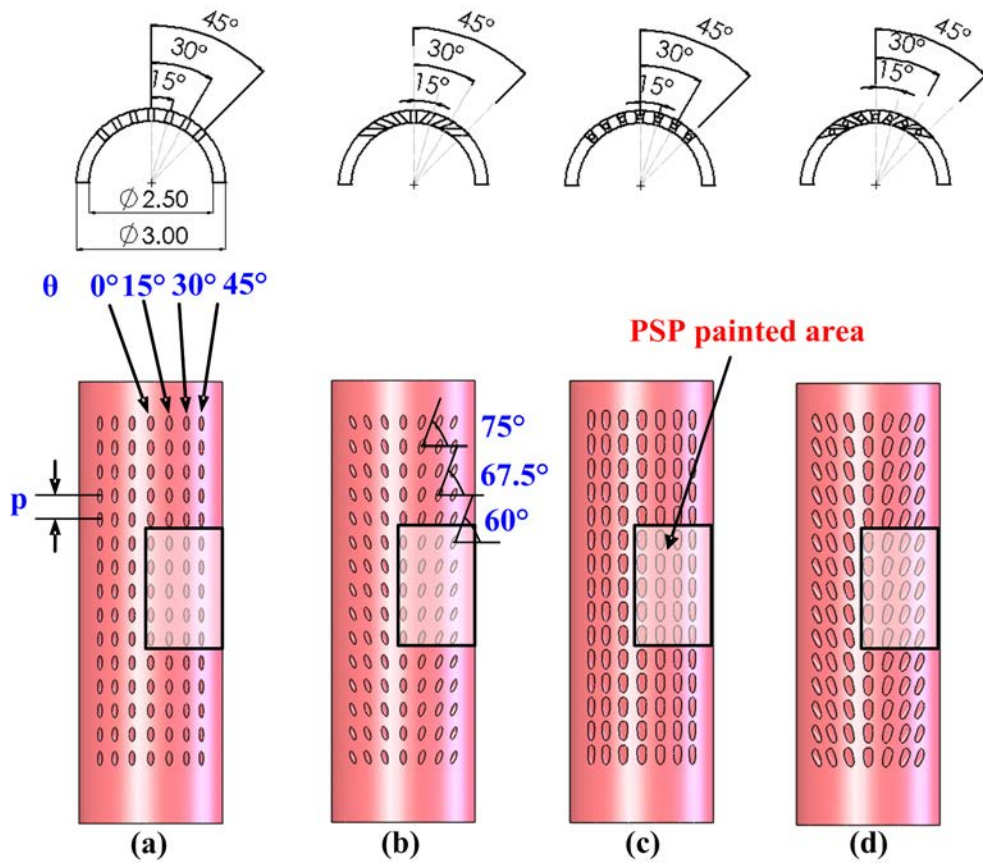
Seven-row film cooled leading edge models (a) Radial angle cylindrical holes (b) Compound angle cylindrical holes (c) Radial angle shaped holes (d) Compound angle shaped holes
